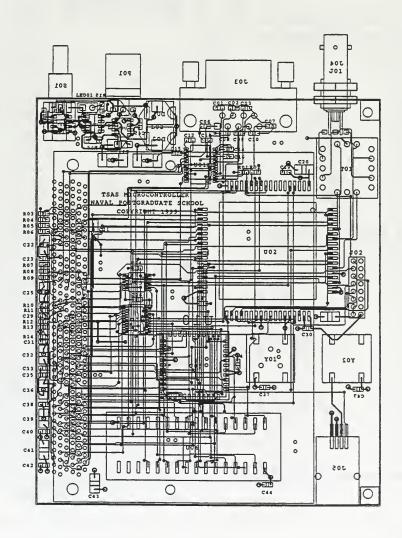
TSAS Microcontroller PCB, Showing Both Sides and All Layers of Etch
